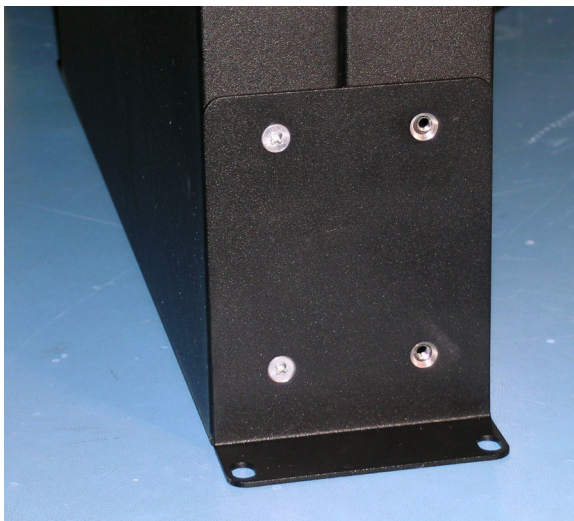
Side Plate ("Ear") with Two Mounting Screws Removed
